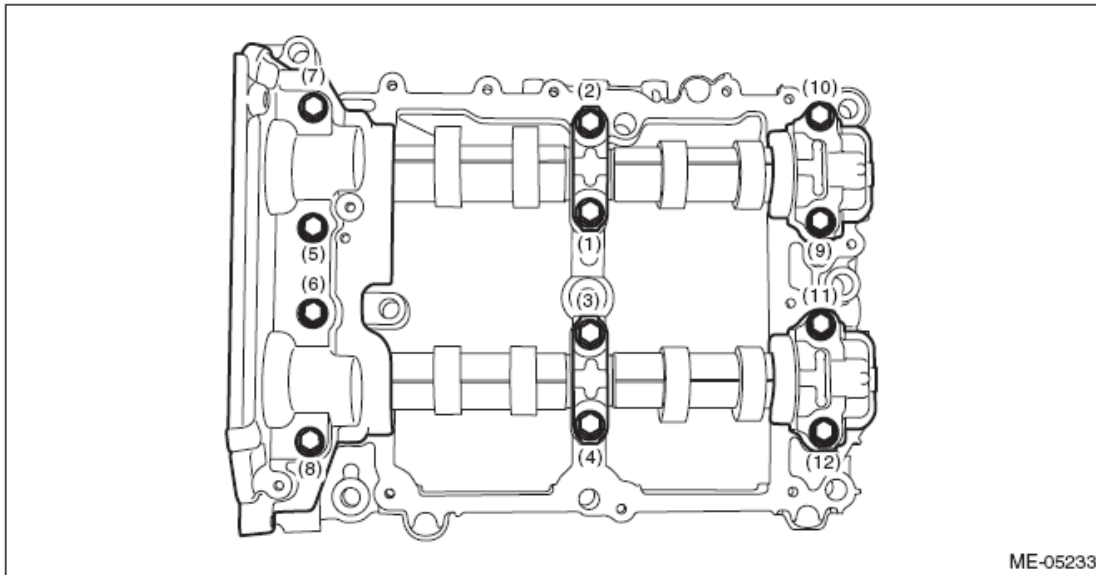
Identifying Camshaft Cap Bolts Tightening Sequence
